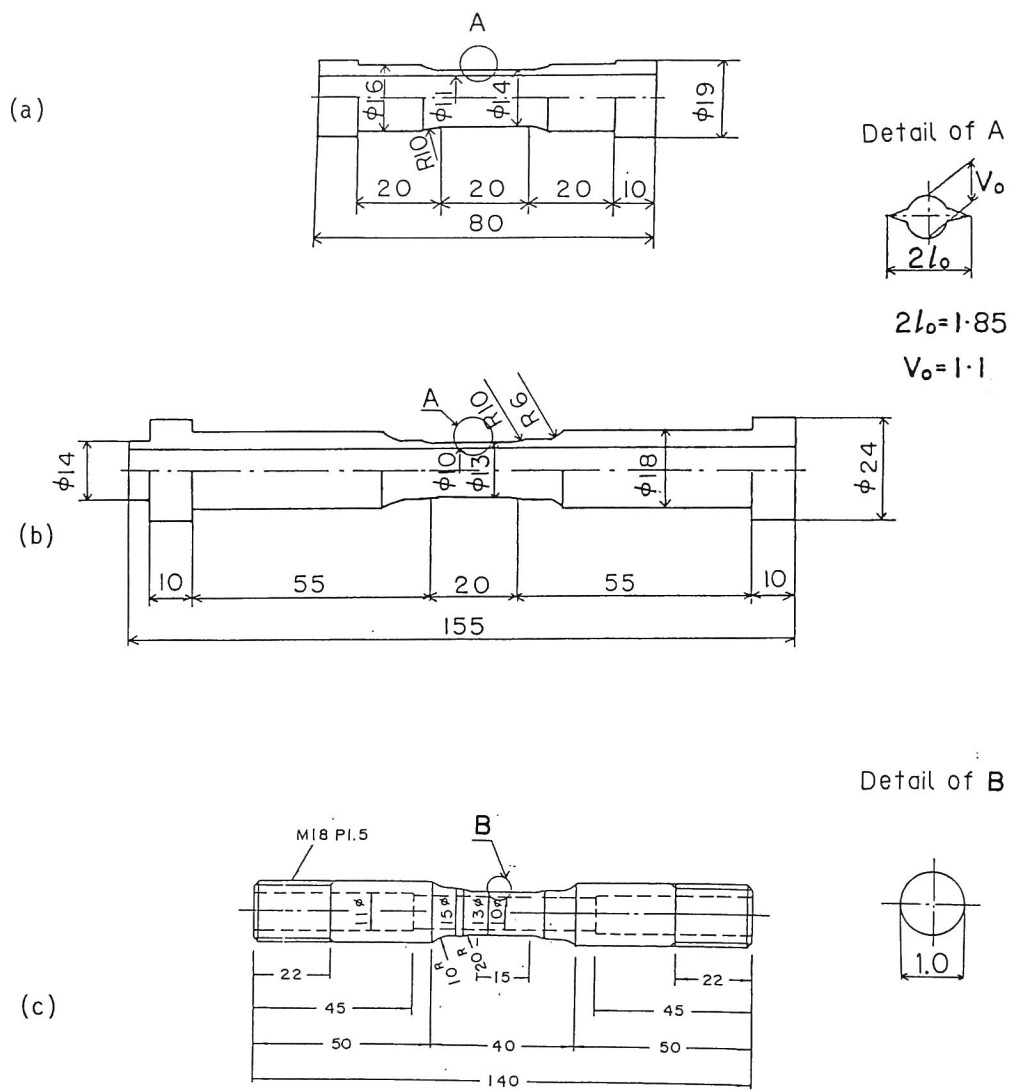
Shape and size of specimens. Dimensions are in mm.
